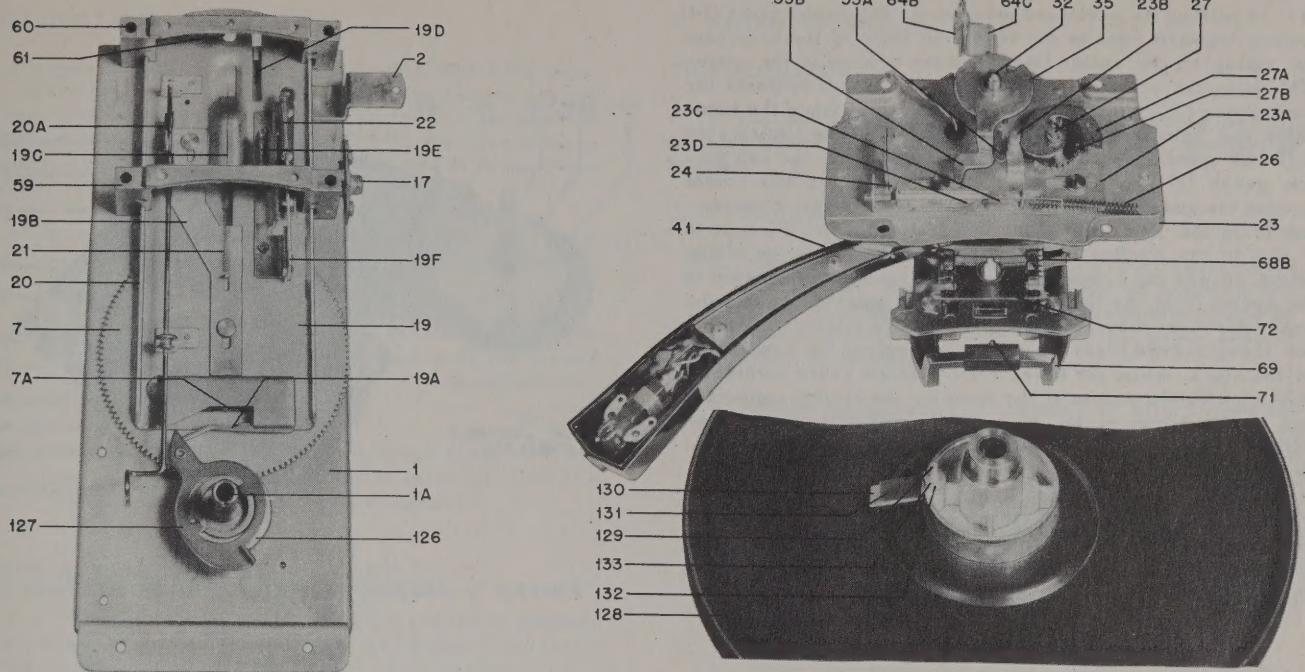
DISASSEMBLED VIEW OF RECORD CHANGER MECHANISM
